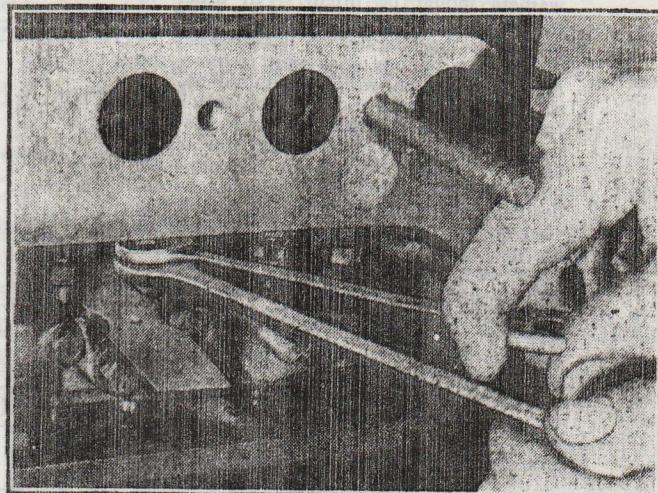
Setting tappets utilising two spanners and taper wedge.
